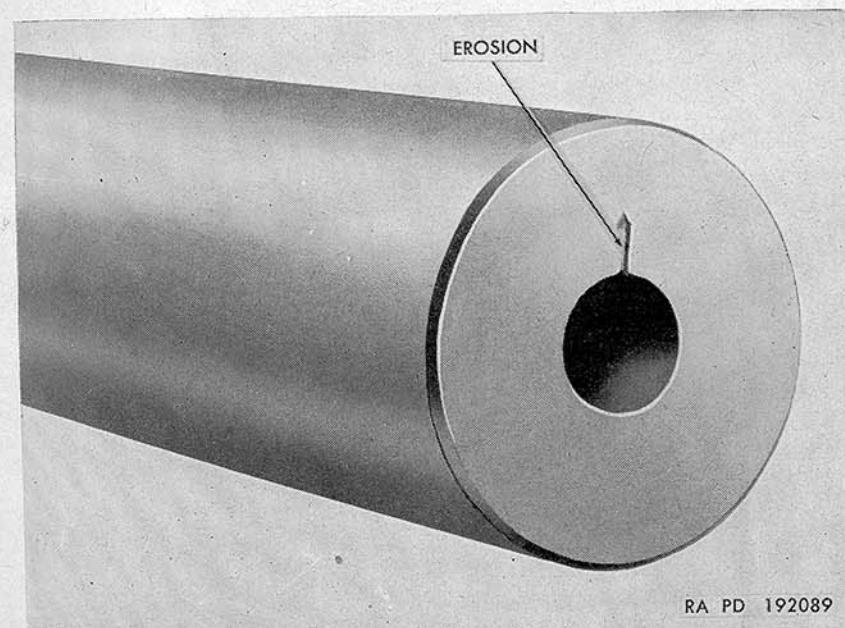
Erosion of breech face of tube caused by defective drum seals.
